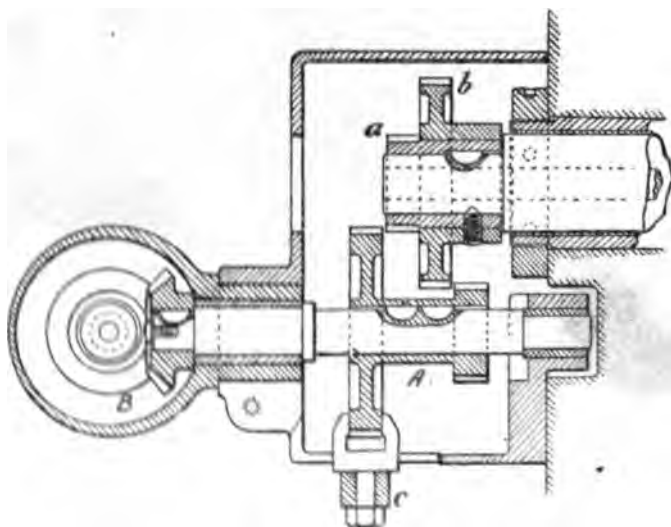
Sliding Gears at Rear of Spindle of Cincinnati Machine.
